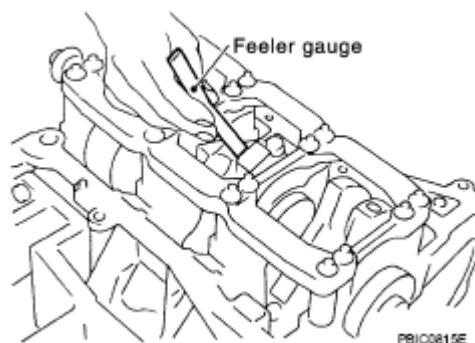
Checking Crankshaft End PlayCONNECTING ROD SIDE CLEARANCE
